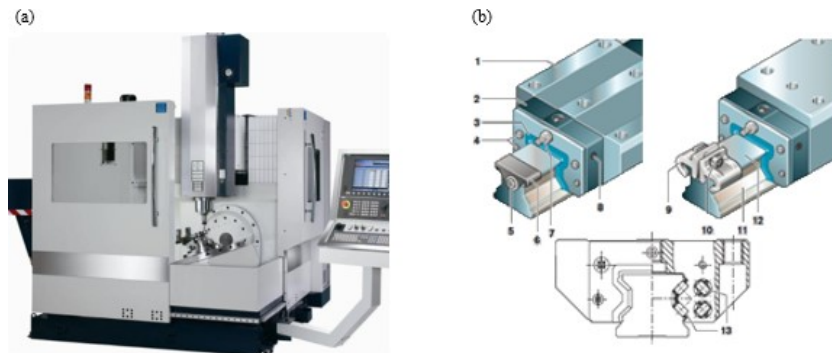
(a) Spinner U1520 Five-axis CNC [37] (b) Bosch-Rexroth Linear Guide [38]
